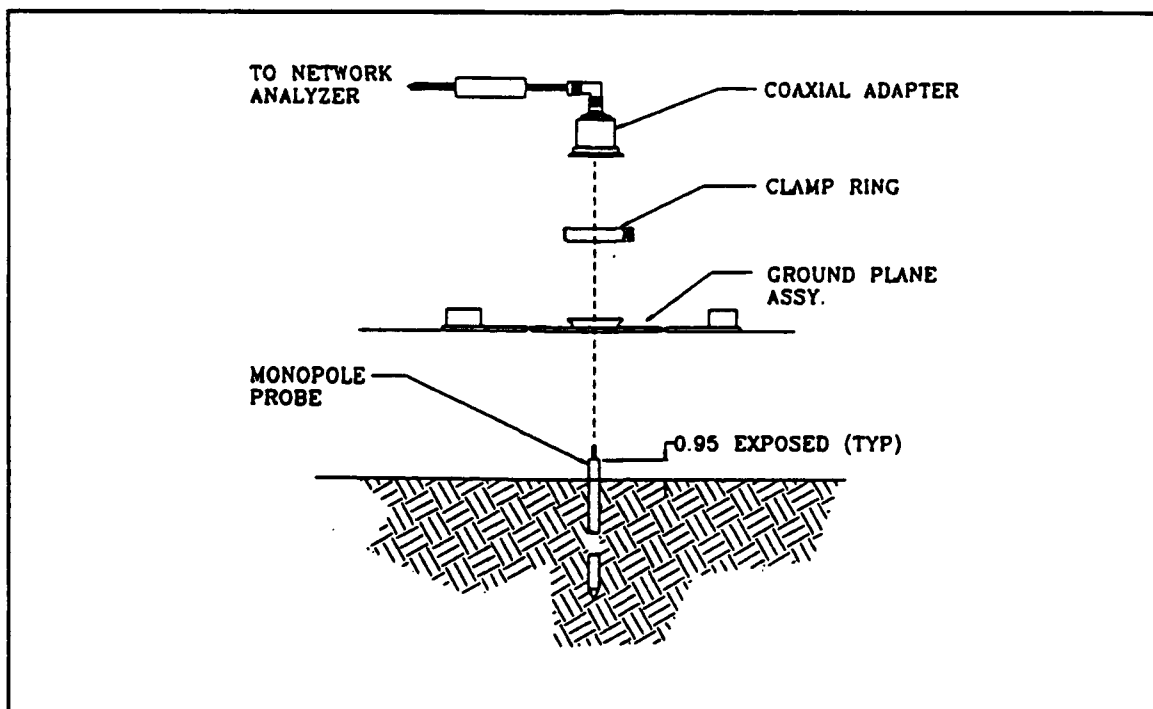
Exploded view of 6" ground measurement probe [From Ref. 6].
